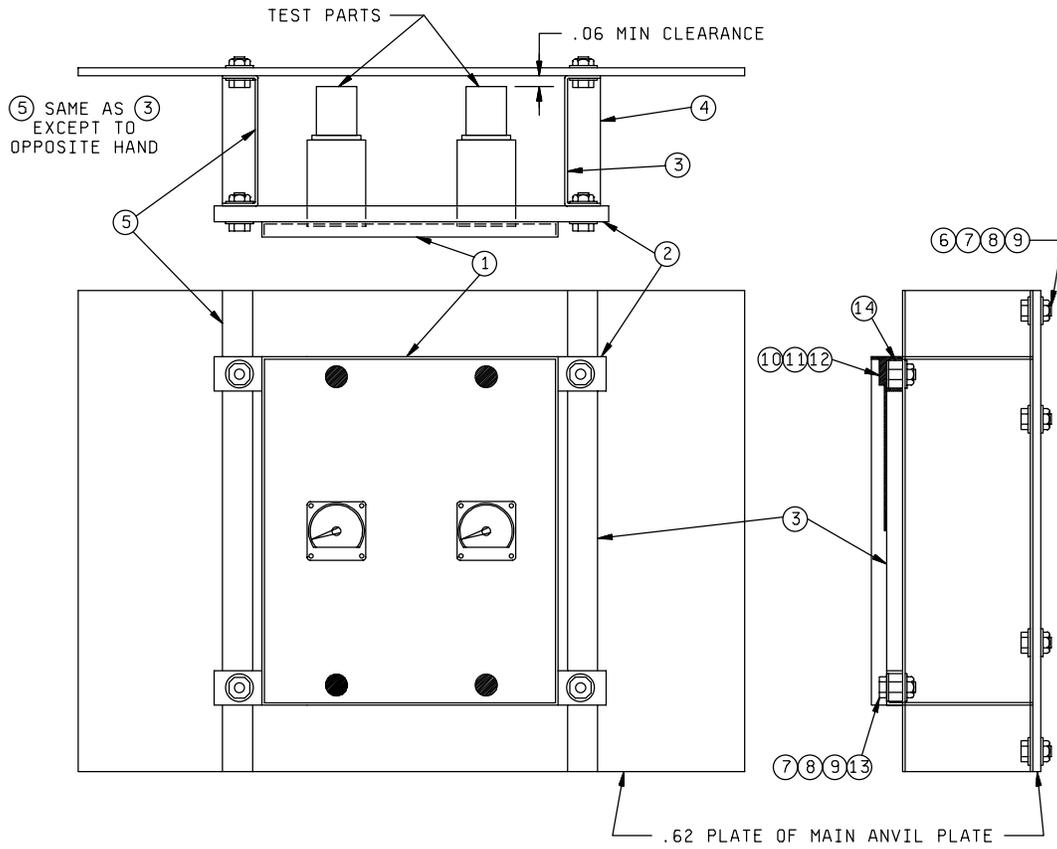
A. Standard mounting fixtures for electrical-indicating switchboard meters and other panel-mounted parts.
